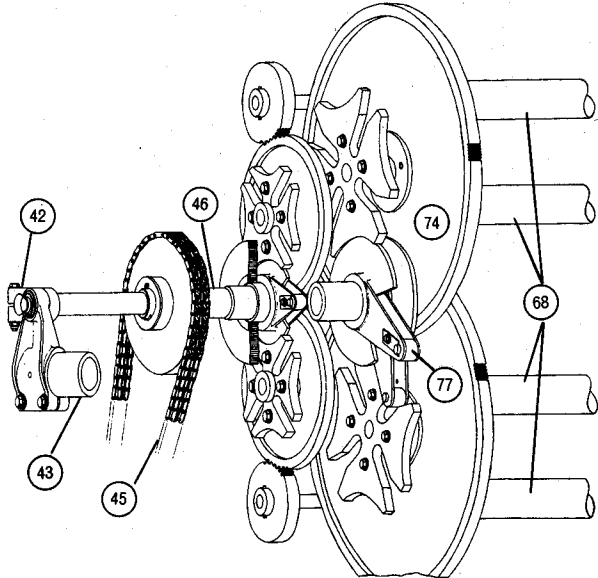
Schematic drawing of Type HD Geneva mechanism and drive
